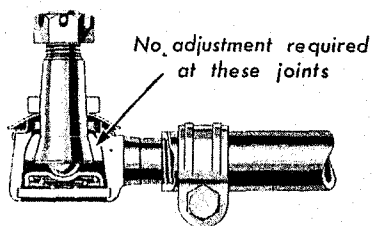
Steering Tie Rod End Series 37-50 and 60
